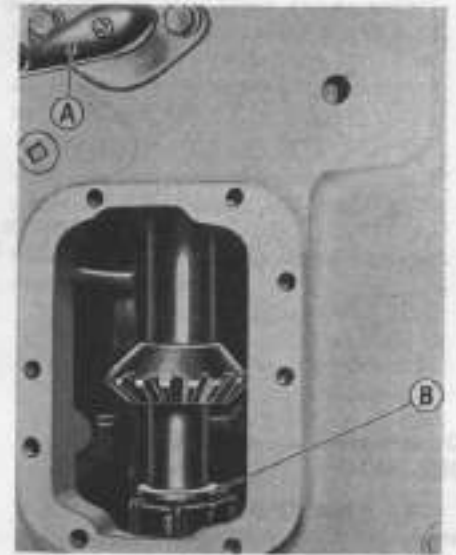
Power take-off shaft and lift bevel drive gear—20, 20K, 81 and 82.
